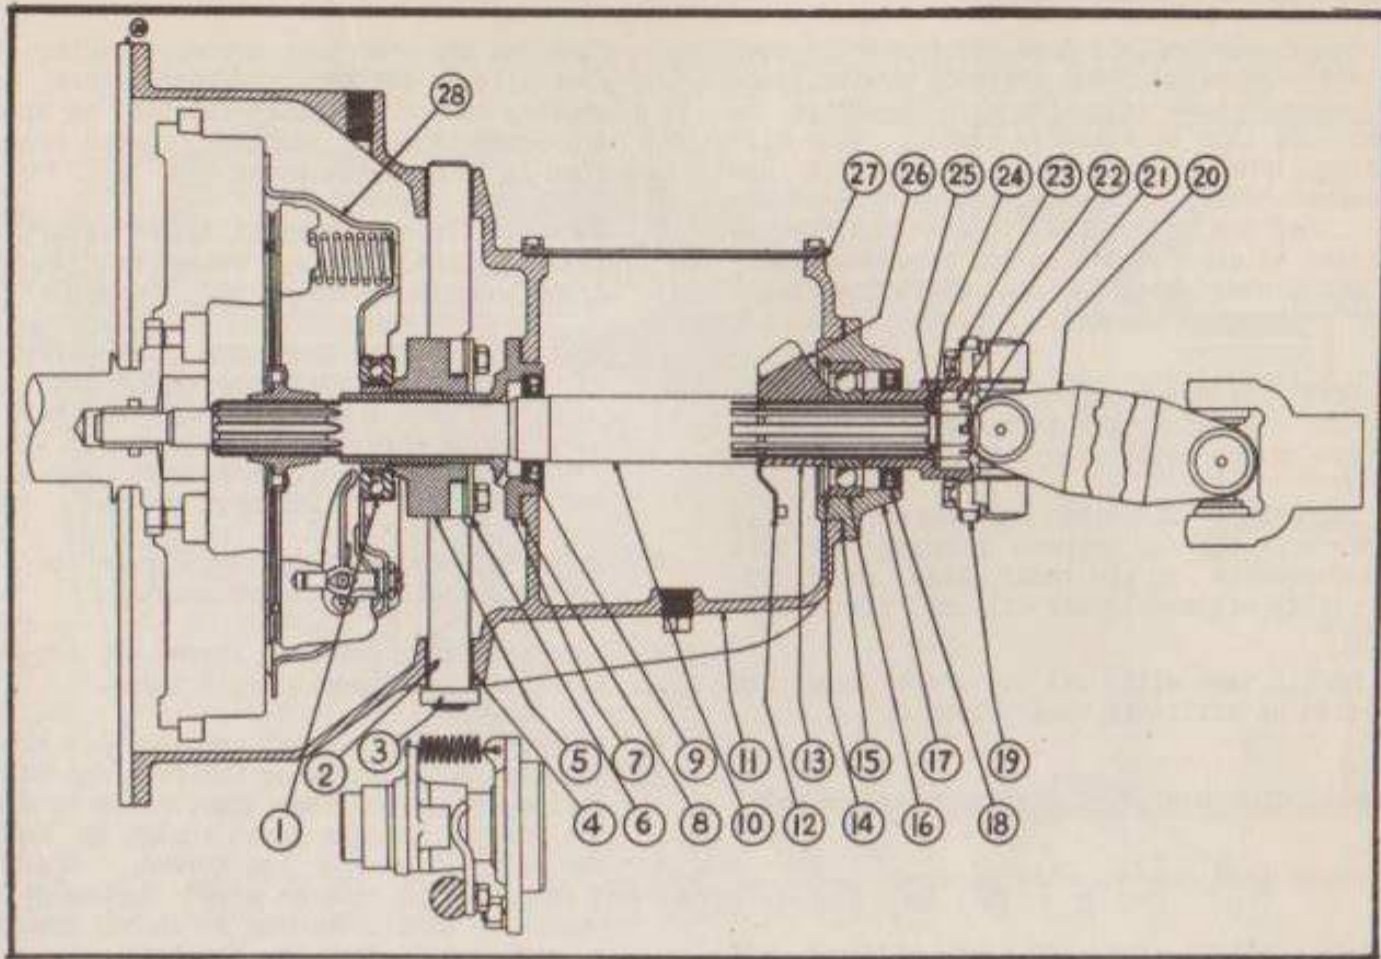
CLUTCH AND BELT PULLEY GEAR HOUSING
